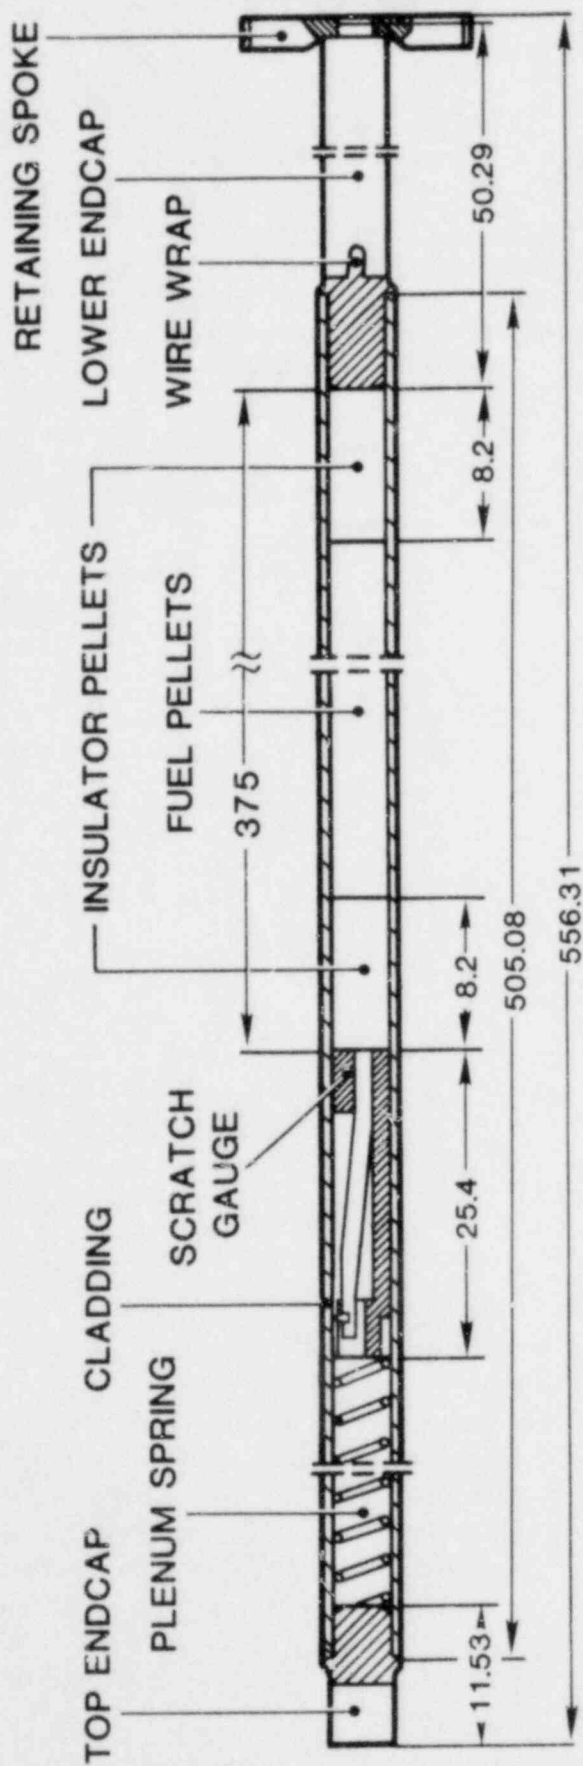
PBE Carbide Fuel Pin (All dimensions in millimeters)
